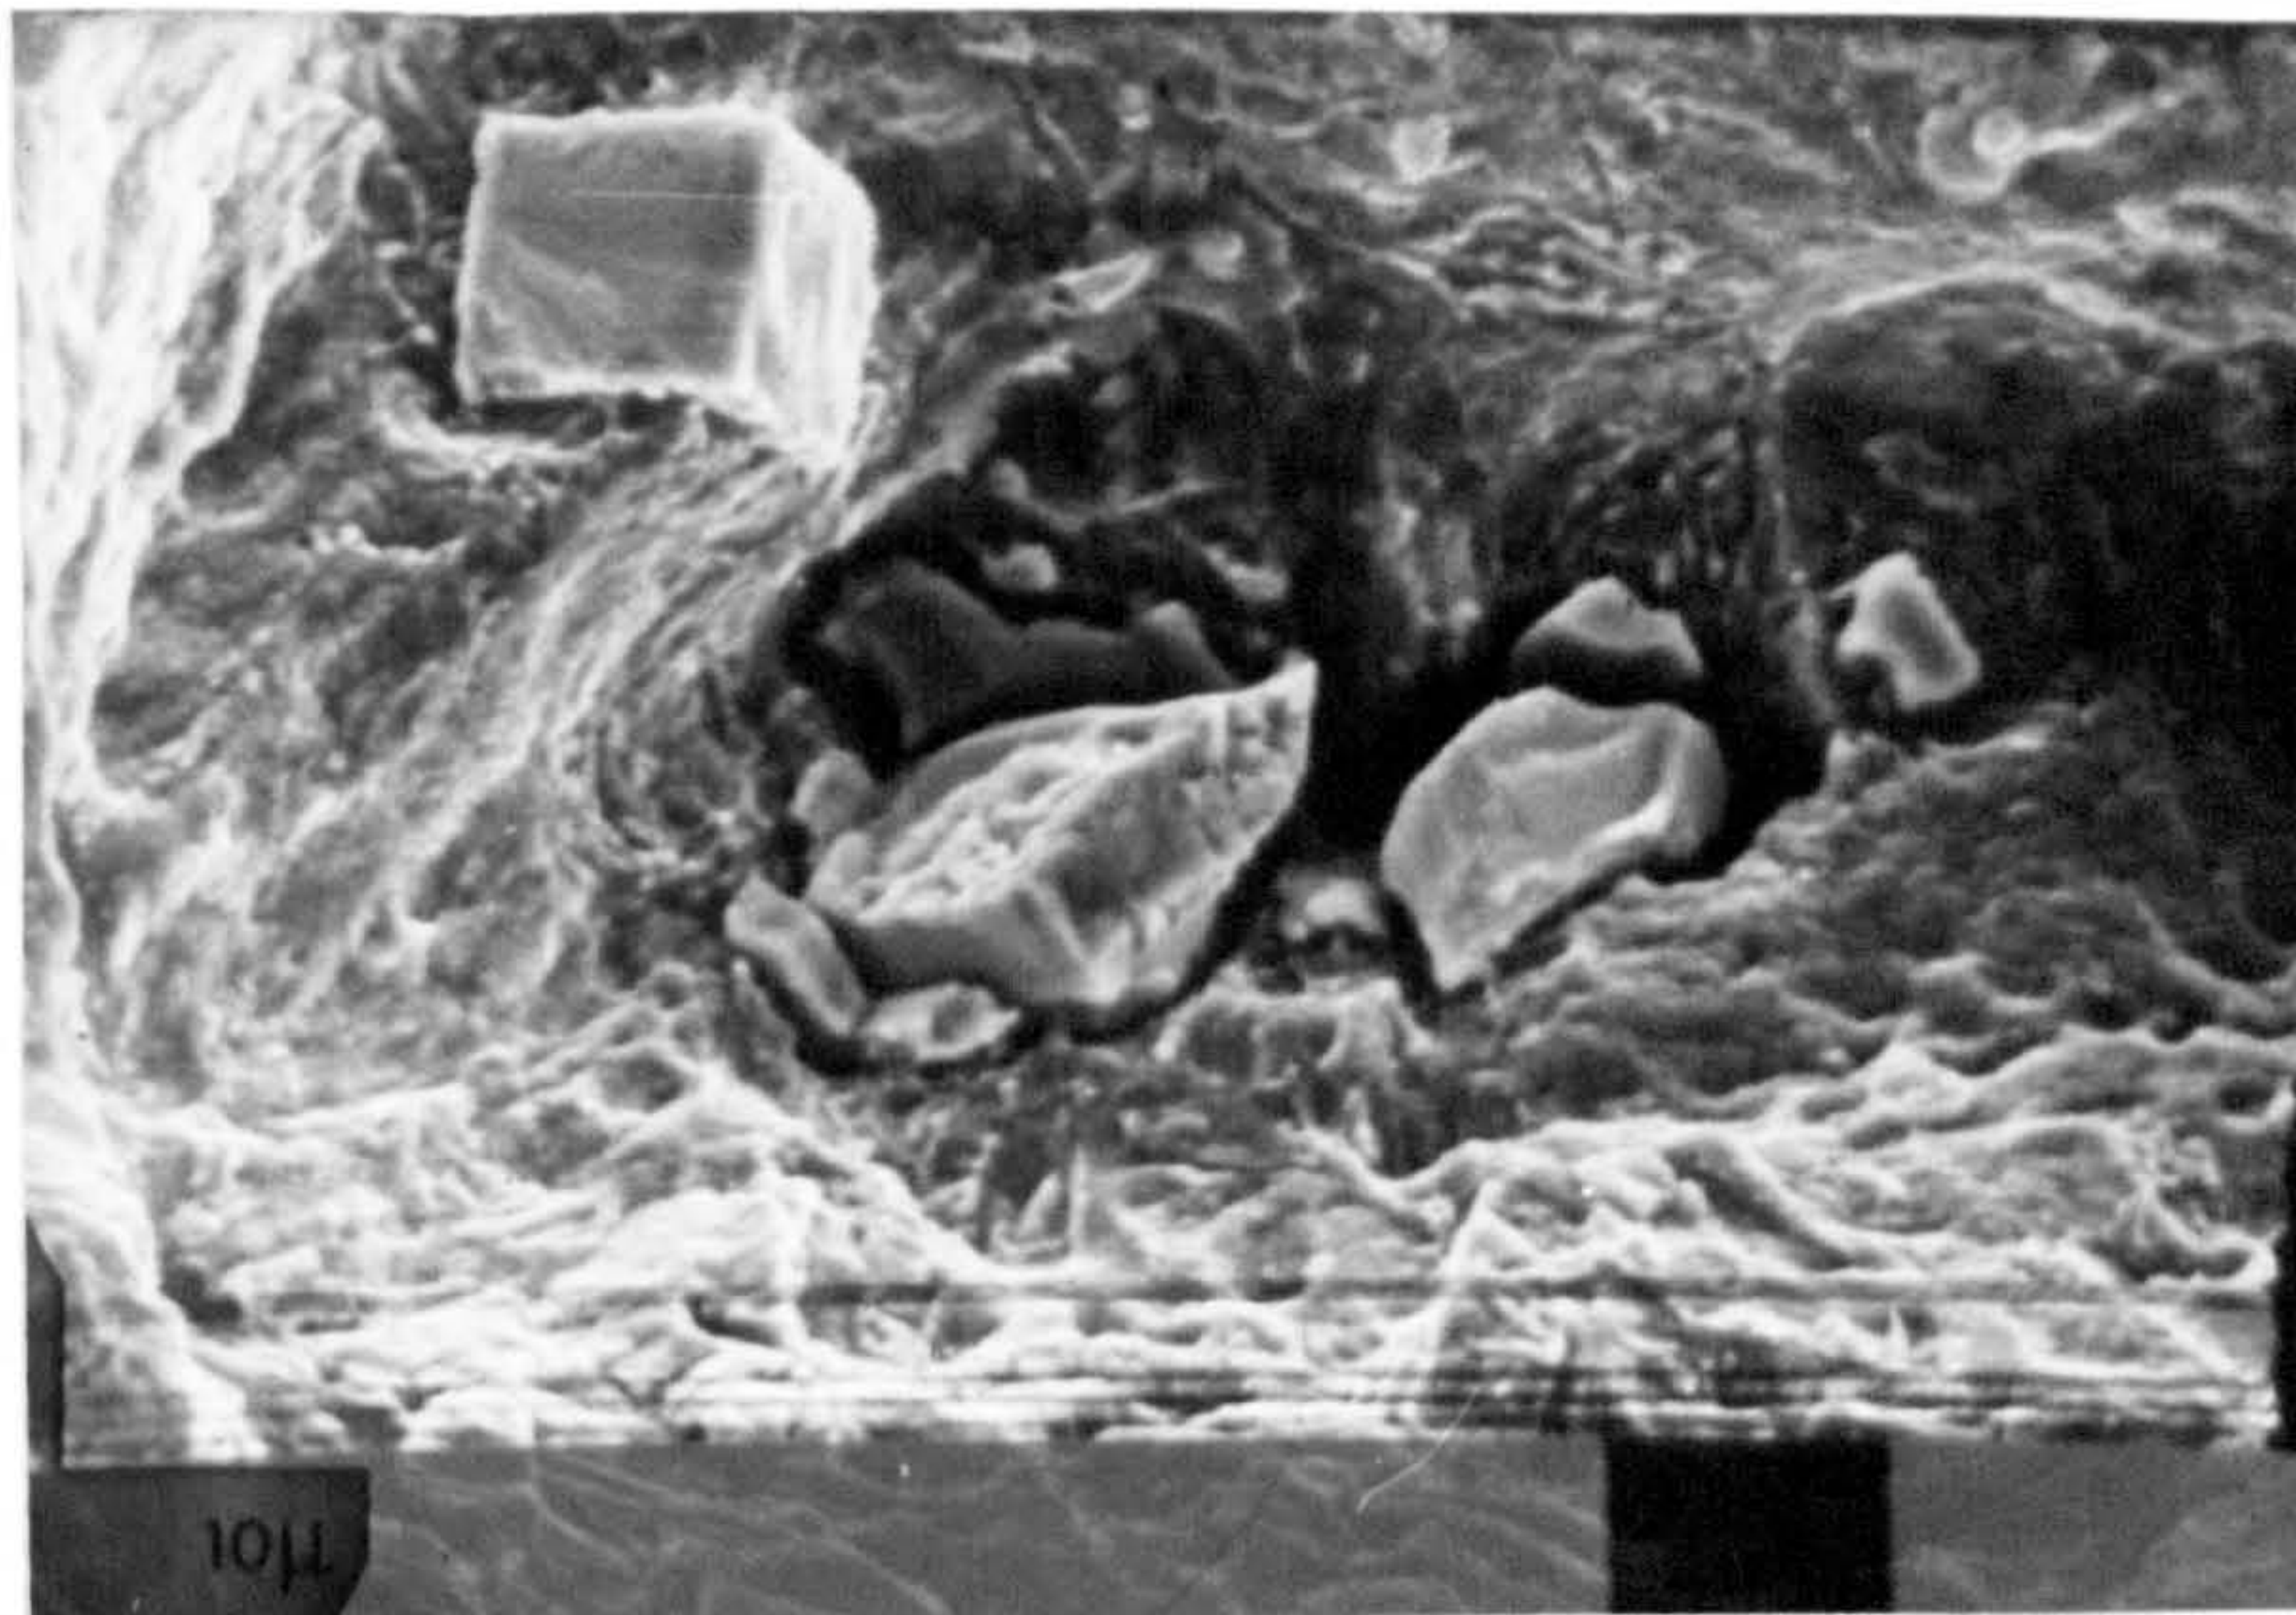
Fracture surface of parent plate showing fragmented inclusions
